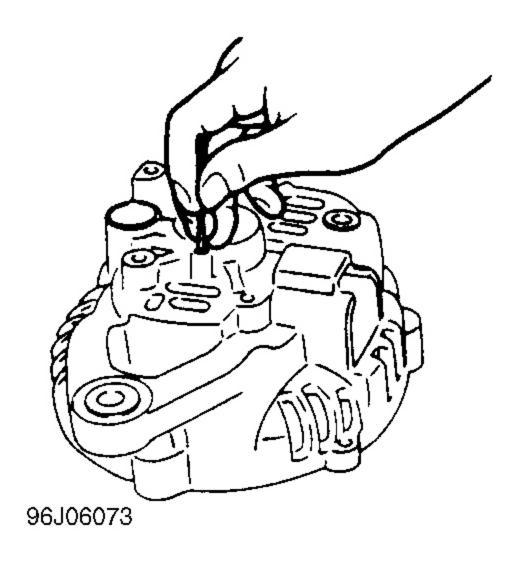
Inserting Wire To Retain Brushes For Reassembly Courtesy of MAZDA MOTORS CORP.
